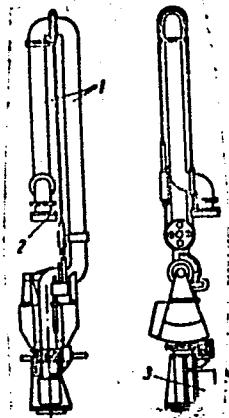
1 - swivel-connected pipes; 2 - attachment device; 3 - emergency disconnect unit.
